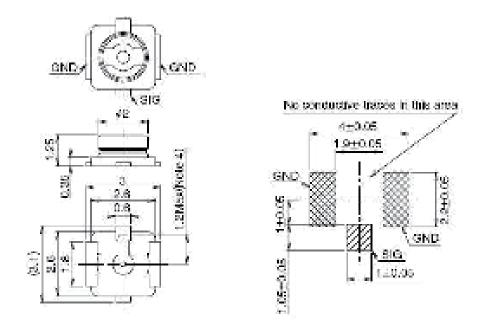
Dimensions of U.FL-R-SMT Connector (Unit: mm)
